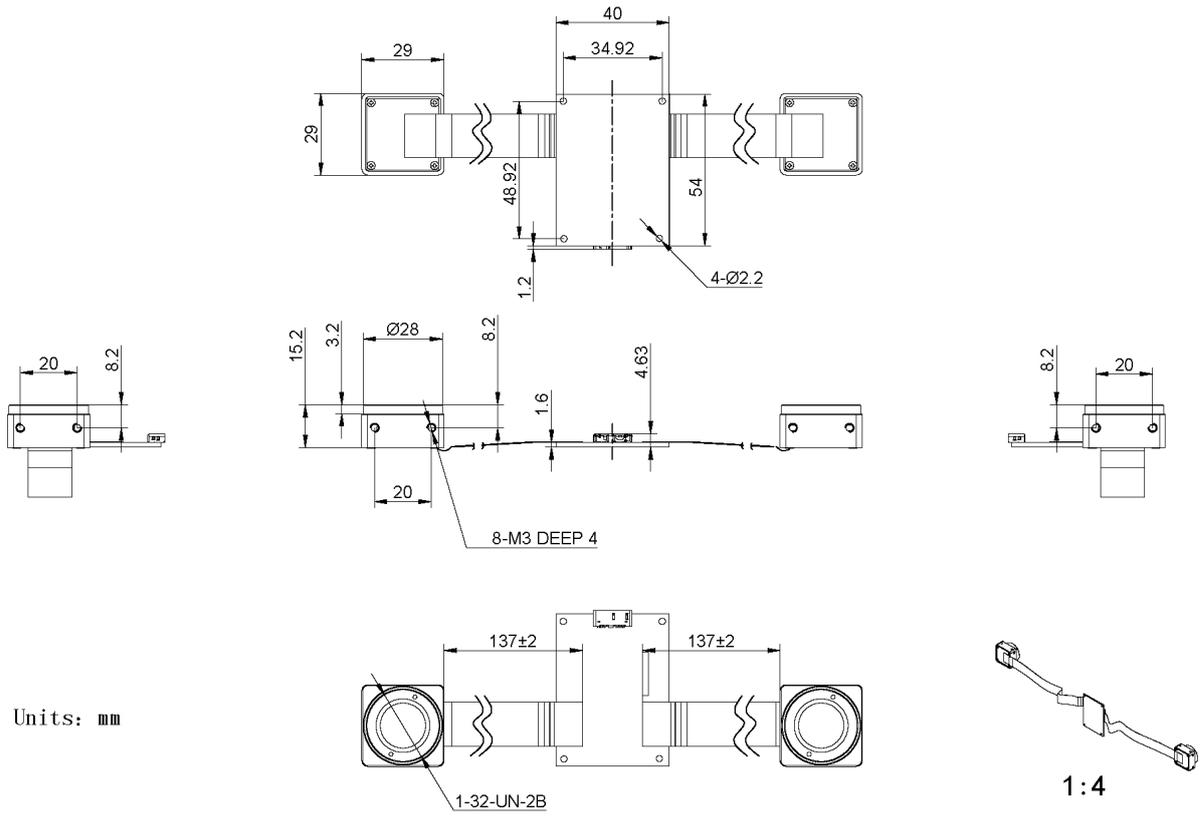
Split USB3.0 binocular camera mechanical dimensions (CS-Mount)
